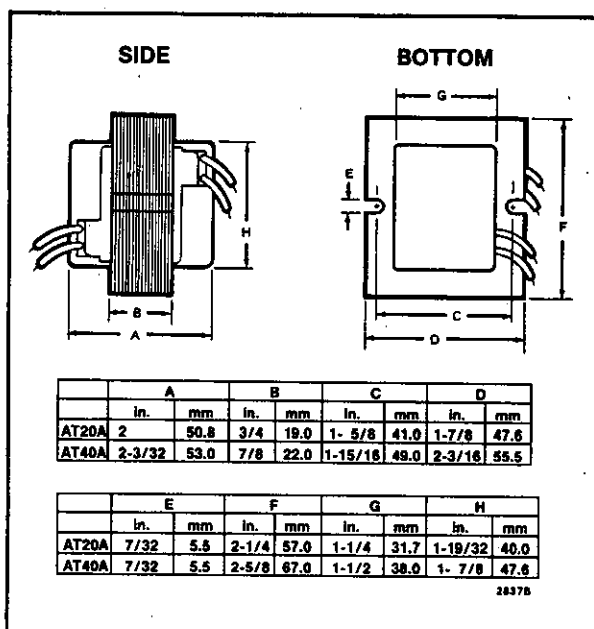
AT20A, AT40A DIMENSIONS IN in. [mm IN BRACKETS].
